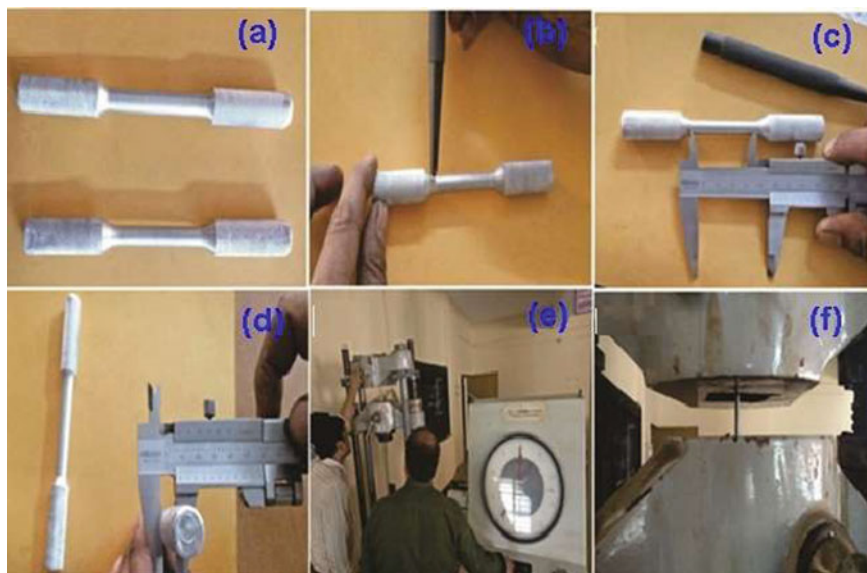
a Samples were prepared for UTM test. b Punching was done to measure gauge length c and d Measurement of gauge length and diameter with Vernier caliper. e Setting of samples in UTM and process of testing is done. g Final position sample at the end of test
